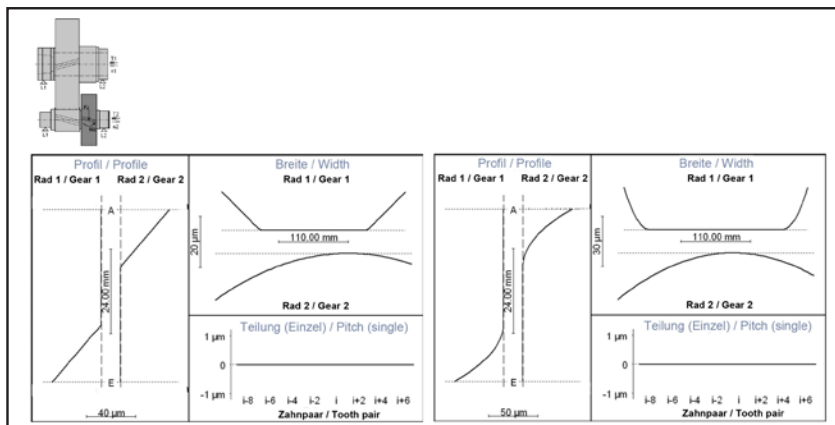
Gearing modifications, separately made in the tooth width and tooth height directions (Ref.3).
